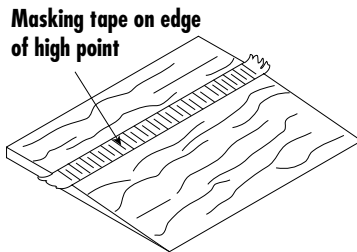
To make a sharp edge on a fin, use a strip of masking tape as a guide.
